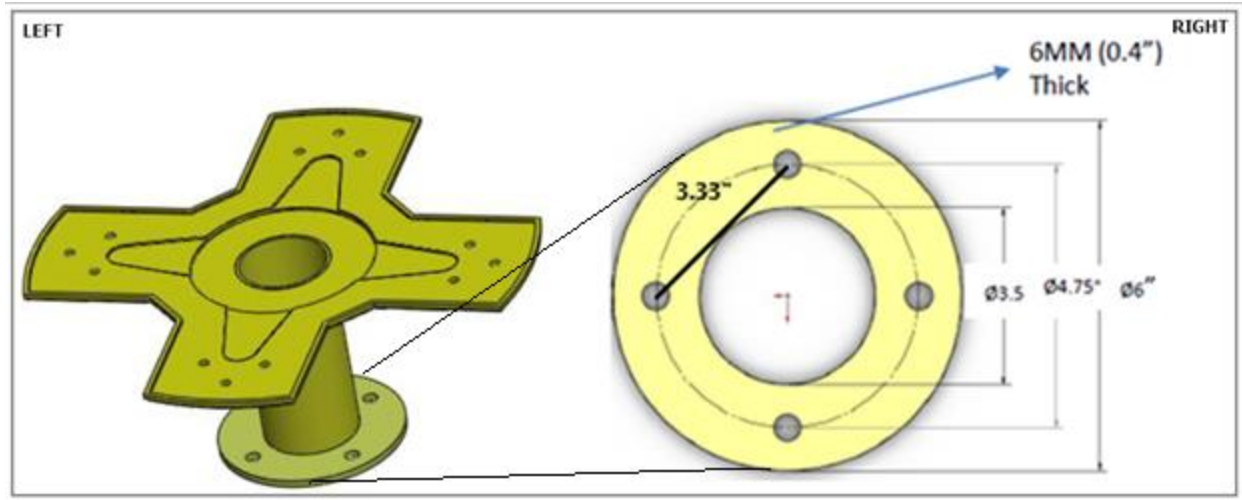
LEFT: The Mounting post/mast and RIGHT: The mounting post baseplate flange
